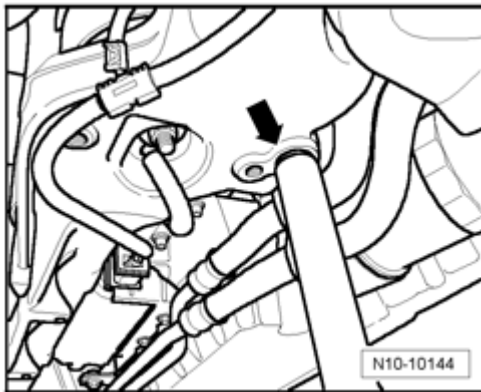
Guiding Left/Right Engine Carrier Mounts Into Corresponding Hole Of Engine Carrier
